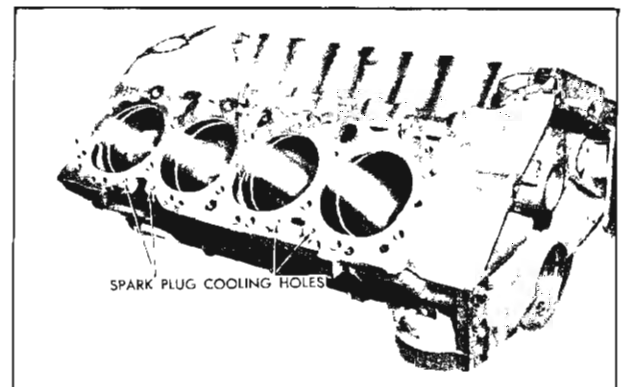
Cylinder Block Spark Plug Cooling Holes
